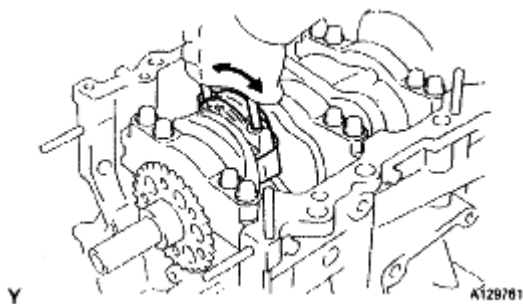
Removing Connecting Rod Cap & Lower Bearing
